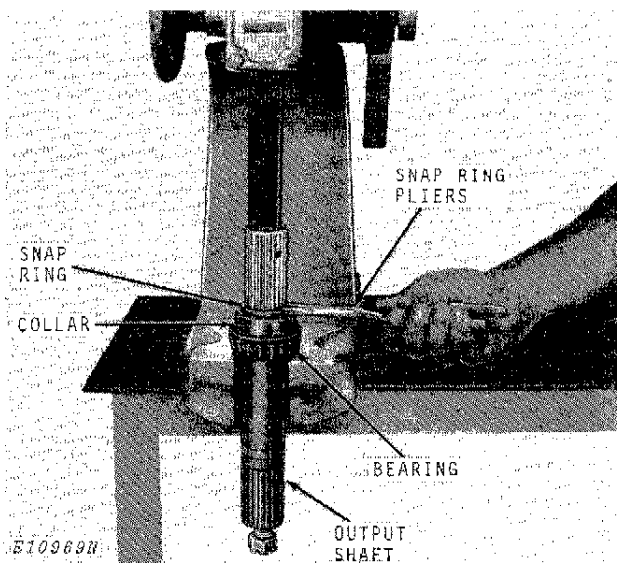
Removing Snap Ring, Collar, and Bearing From Output Shaft
